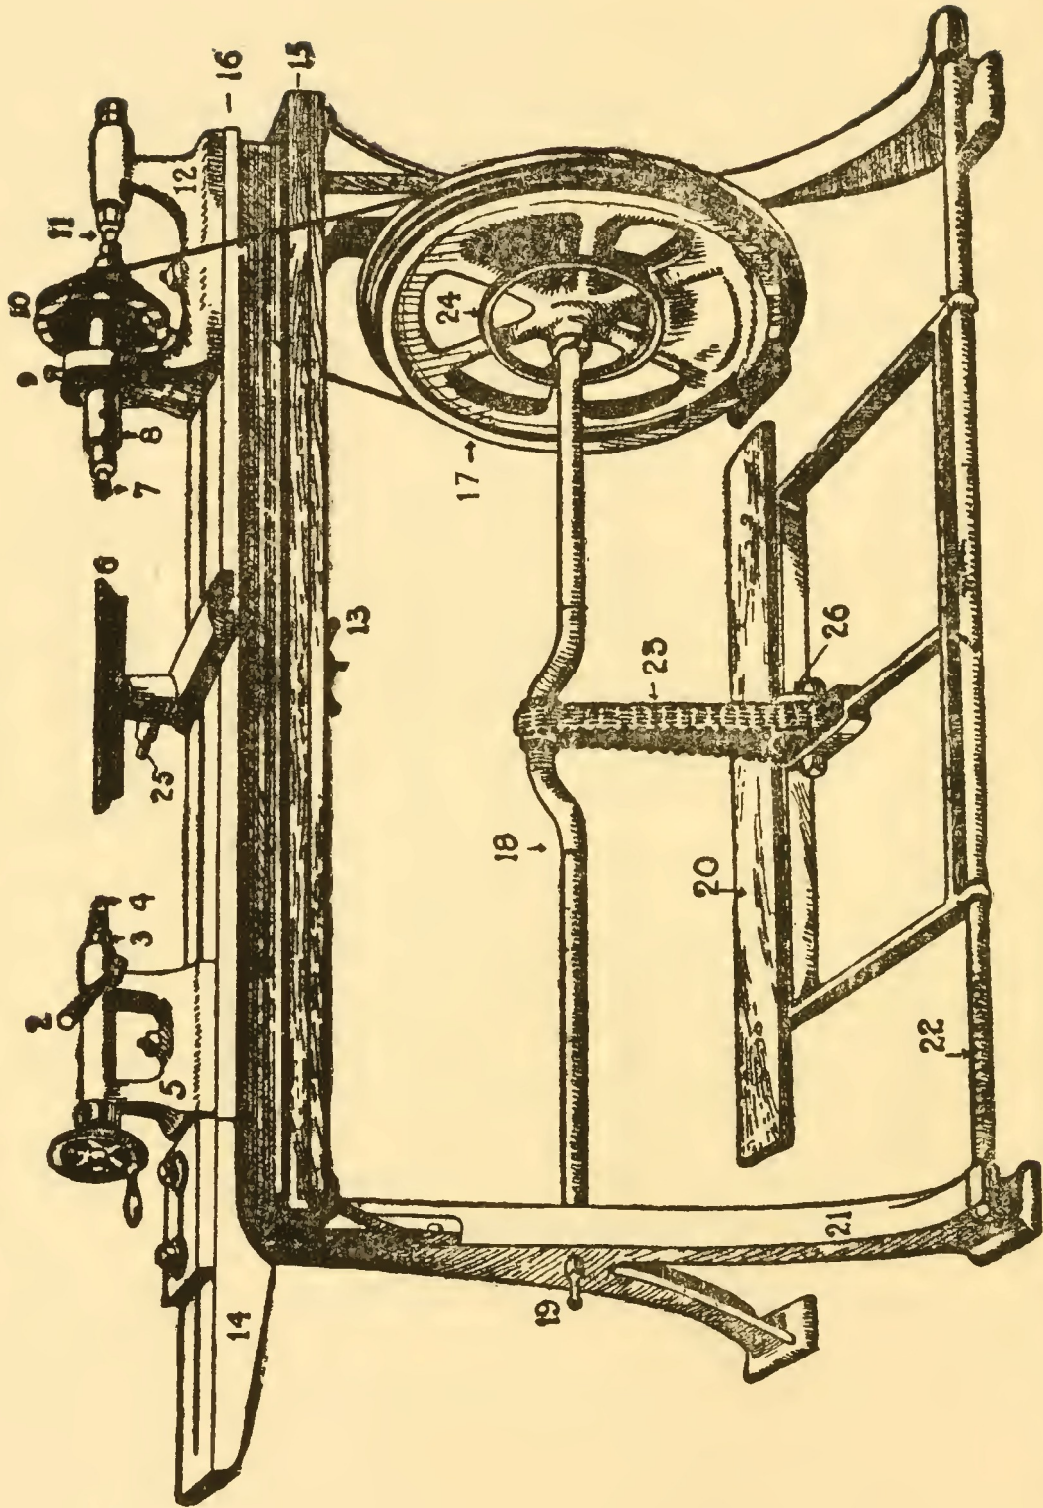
BACK VIEW OF LATHE, WITH PARTS NUMBERED ON OPPOSITE PAGE FOR REFERENCE.
